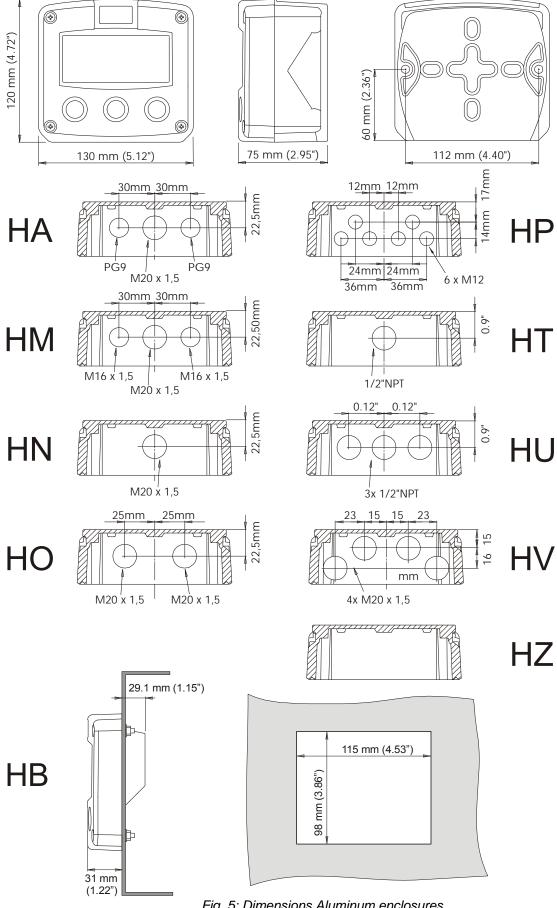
Dimensions Aluminum enclosures. TUR0141\_v0402\_06
